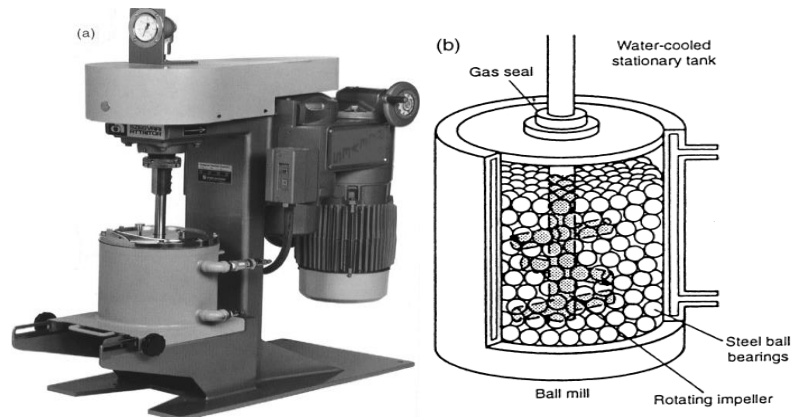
(a) Model 1-S attritor. (b) Arrangement of rotating arms on a shaft in the attrition ball mill. Courtesy of Union Process, Akron, OH[54].
